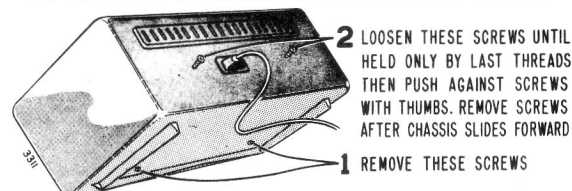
Rear View of Cabinet Showing Chassis Mounting Screws.
